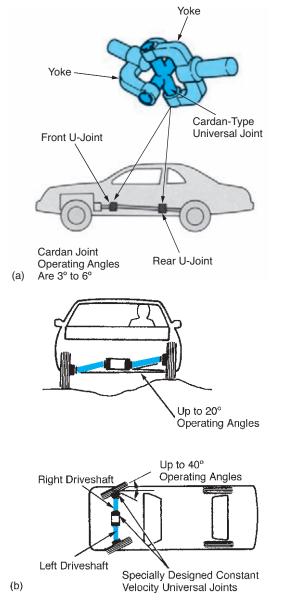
(a) An RWD driveshaft uses a pair of universal joints to allow the rear axle to move up and down. (b) A FWD driveshaft uses a pair of constant-velocity joints to allow the front wheels to move up and down and steer. (*Courtesy of Ford Motor Company*)
